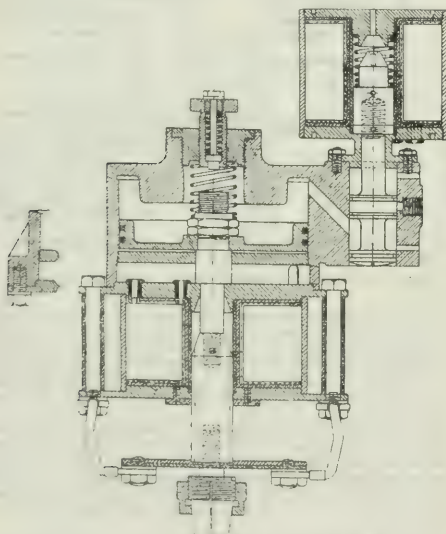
"Cyc-Arc" ELECTRO-PNEUMATIC STUD WELDER.
